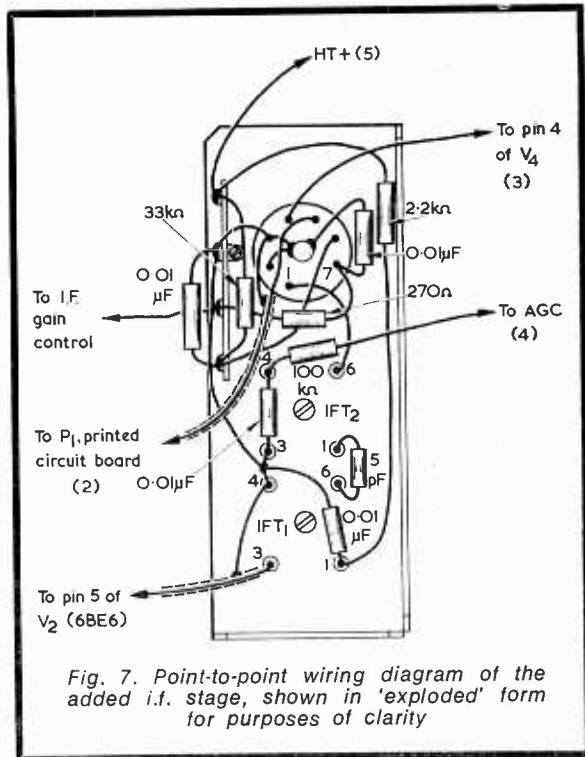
Point-to-point wiring diagram of the added i.f. stage, shown in 'exploded' form for purposes of clarity
